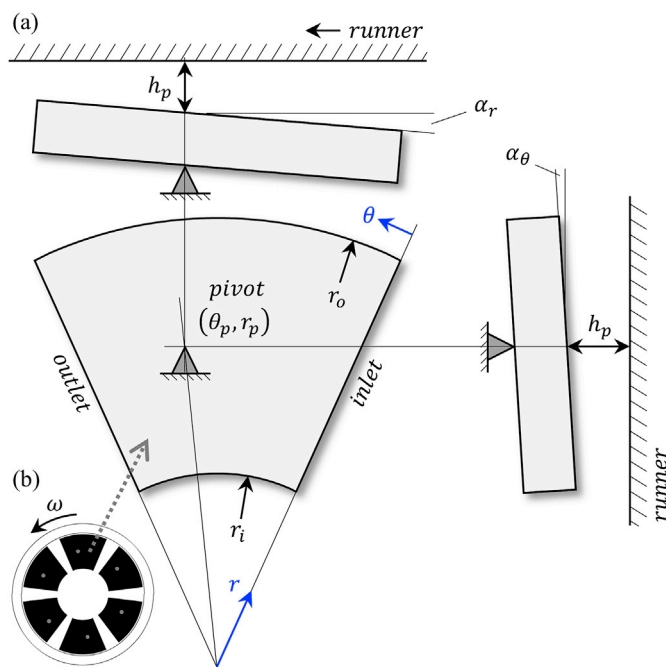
Bearing geometry and film thickness: (a) Pad details with coordinate system and (b) tilting pad thrust bearing geometry.
